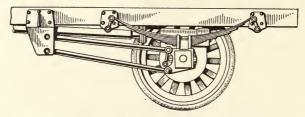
Manly Method of Taking Drive and Torsional Strains.
